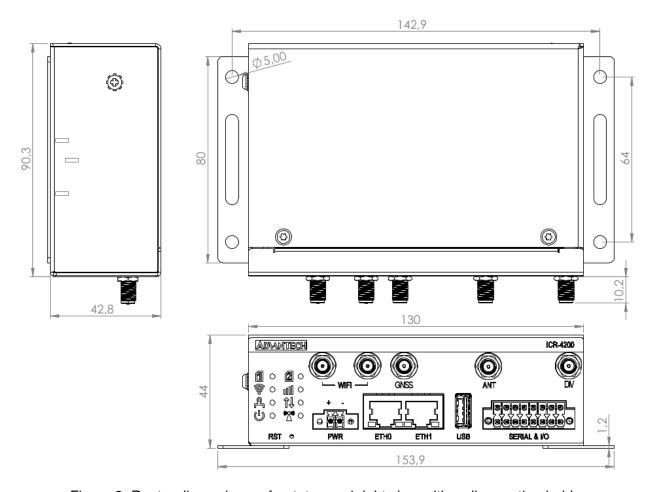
Router dimensions – front, top and right view with wall mounting holder
